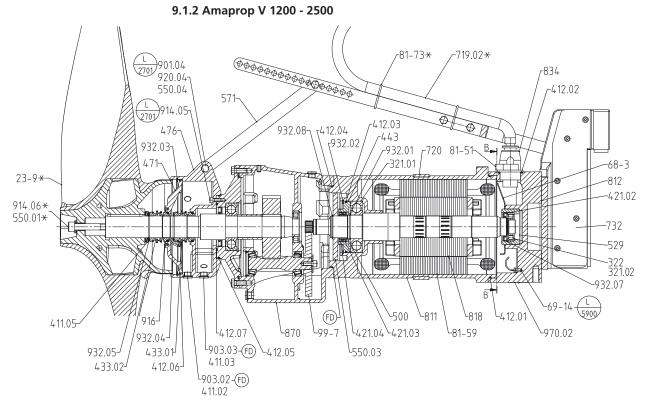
General assembly drawing of Amaprop V 1200 - 2500
